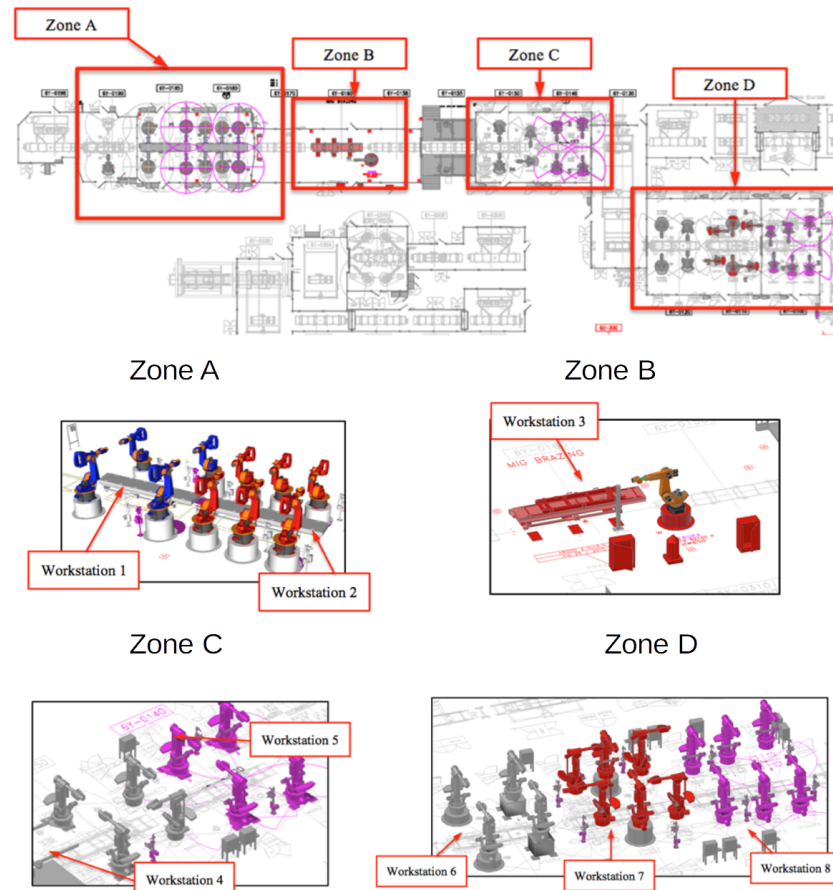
Red circle indicates the 8XY welding line location in the line view.
